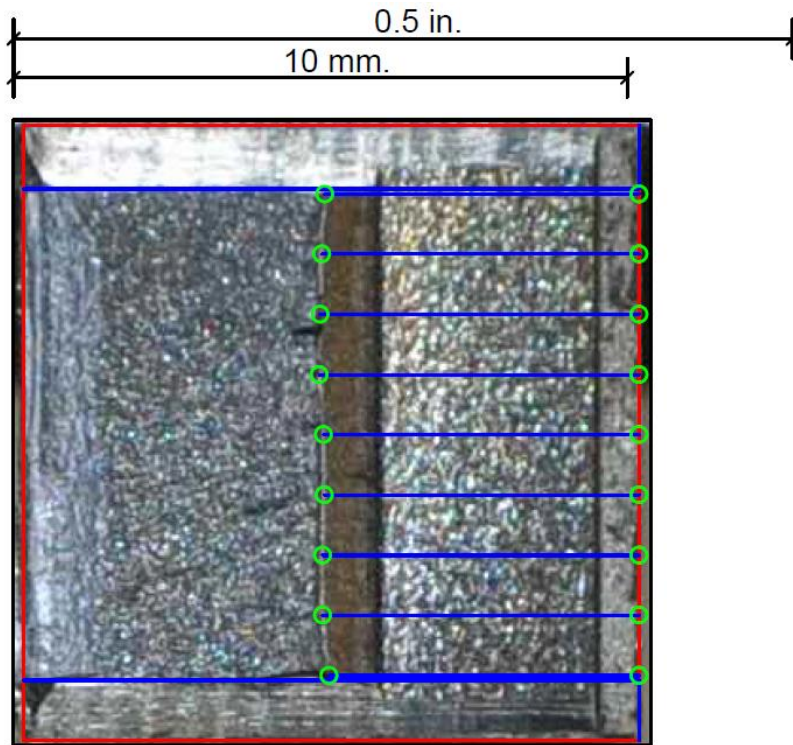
Specimen H11' Fracture Surface
